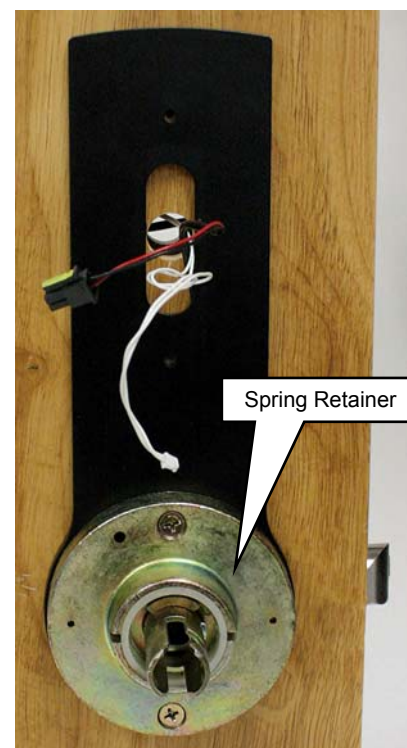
E: INSTALL THE SPRING RETAINER AND SECURE WITH TWO LONG SCREWS
